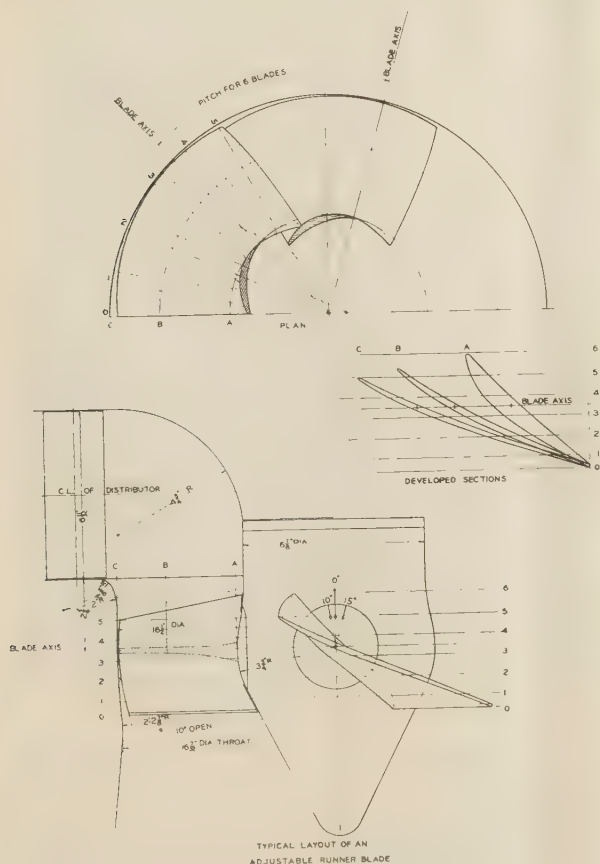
TYPICAL LAYOUT OF AN ADJUSTABLE RUNNER BLADE
